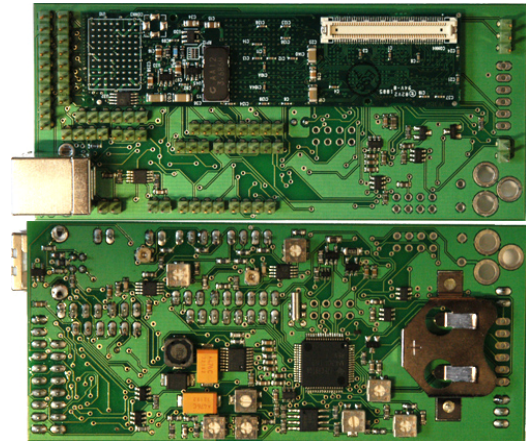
PCB showing Gumstix (darker pcb on top picture) and underside view (lower).
